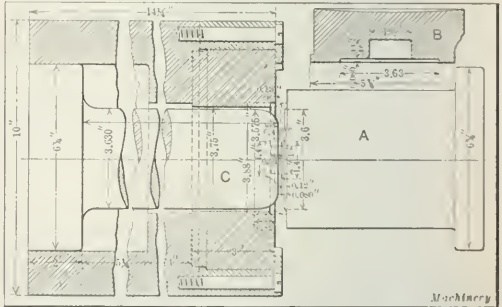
Diagram showing Dies and Heading Tools used in Machine shown in Fig. 7
